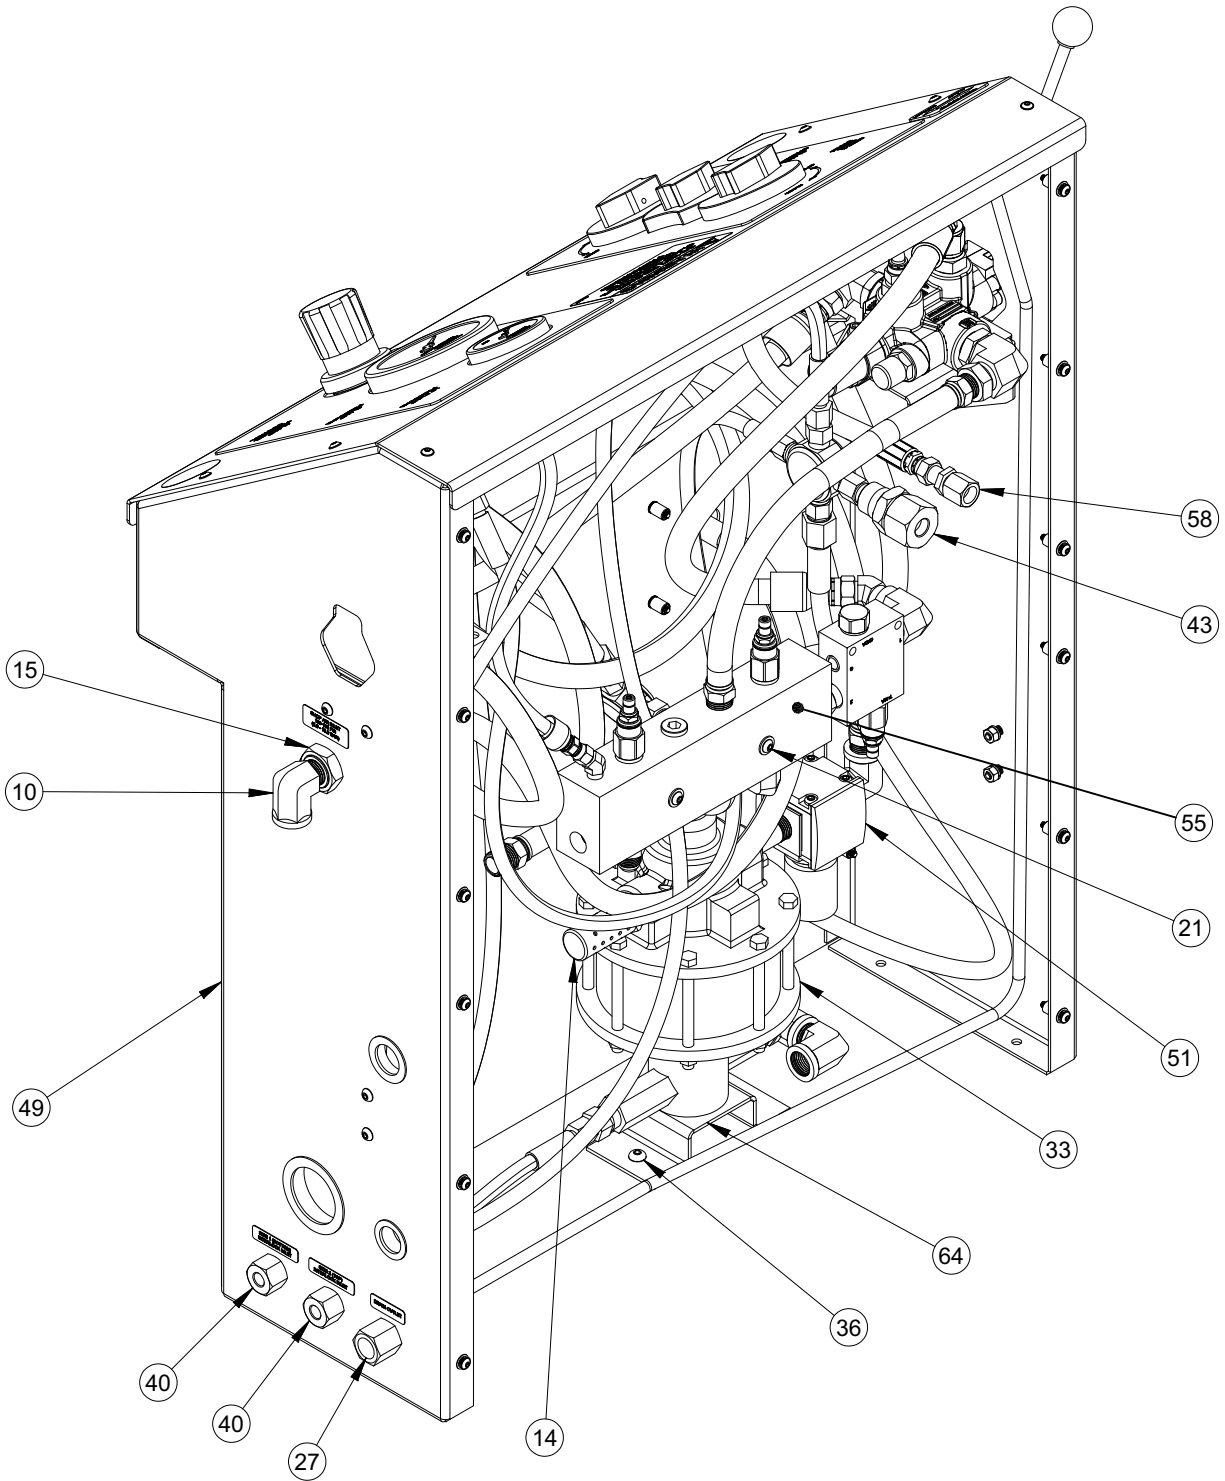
CONTROL CONSOLE USV ASSEMBLY BACK (P/N 89020)
